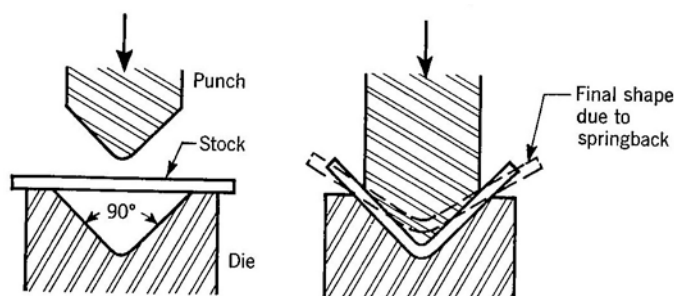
Bending a piece of flat material using a punch and die. The length of the workpiece is limited by practical limitations in the length of the die and punch. The figure shows how the workpiece springs back after bending.
